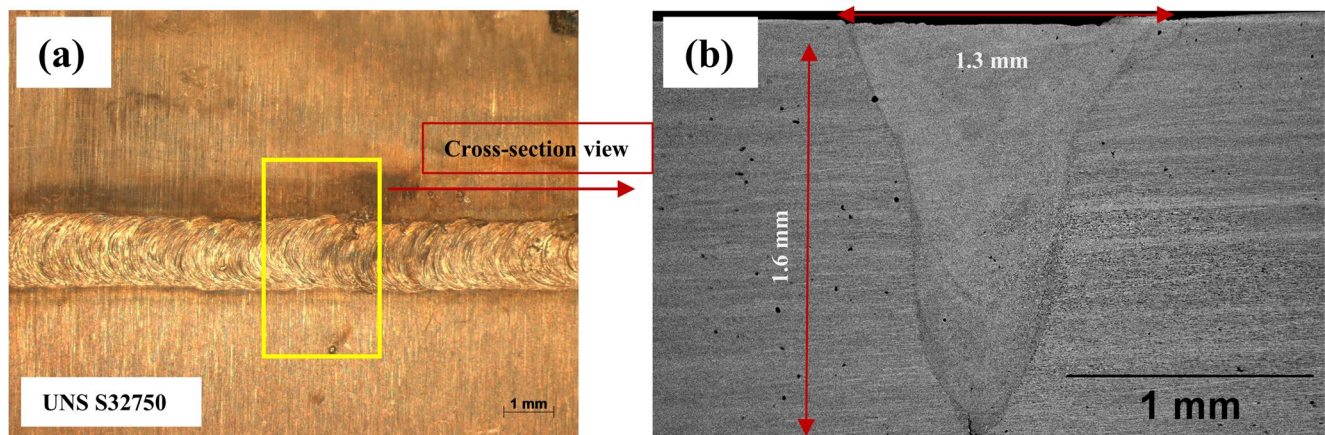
a Top surface view of the weld bead for sample Co_1 b transverse cross-section of the weld bead for sample Co_1
